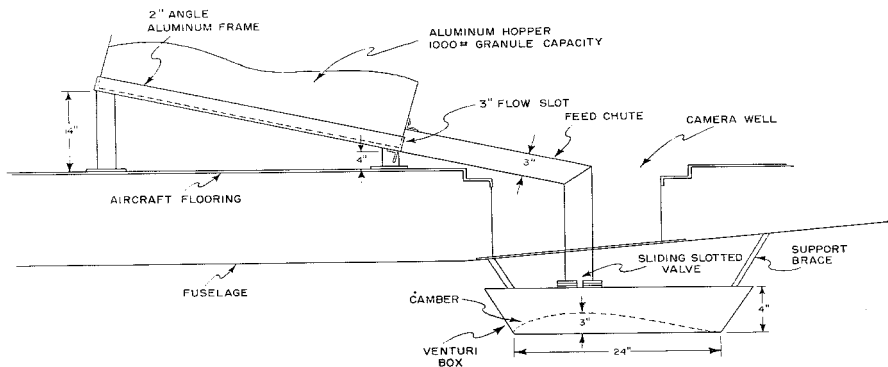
Construction details of L-20 insecticide dispensing apparatus.
